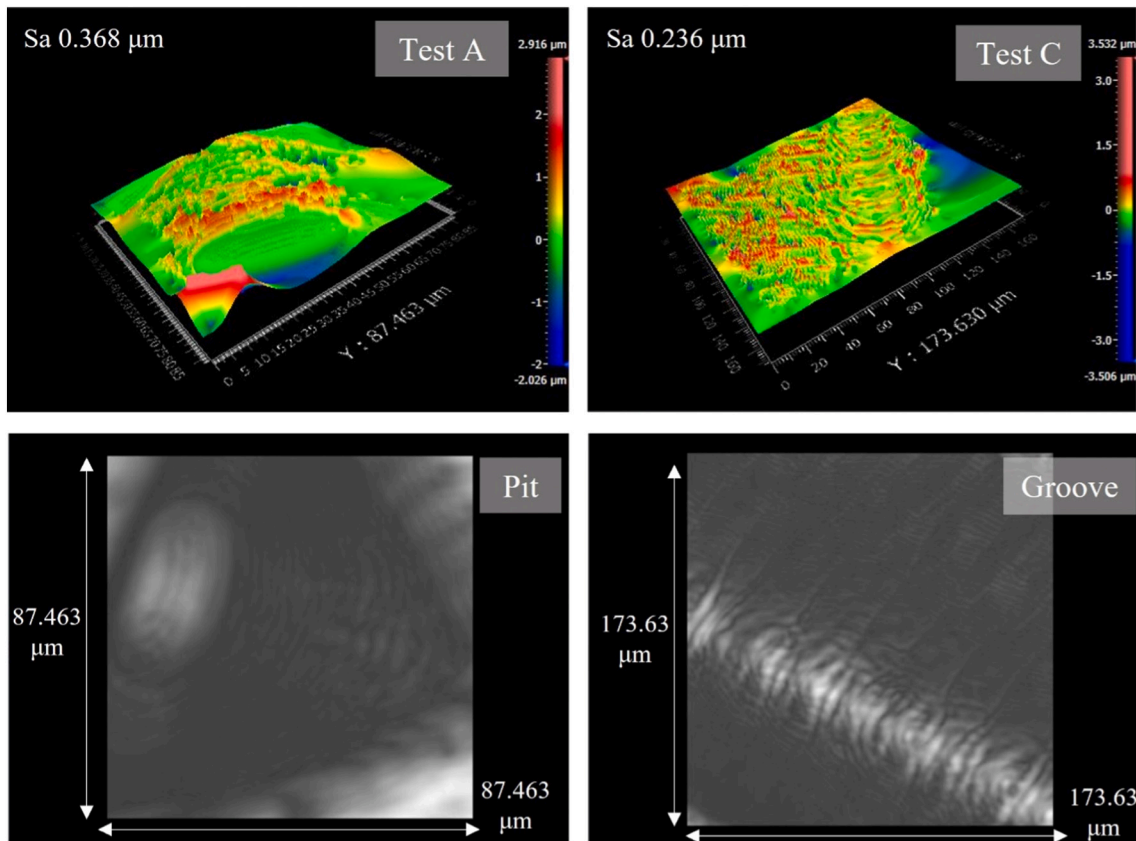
Surface roughness measurement on the machined surfaces from tests A and C.
